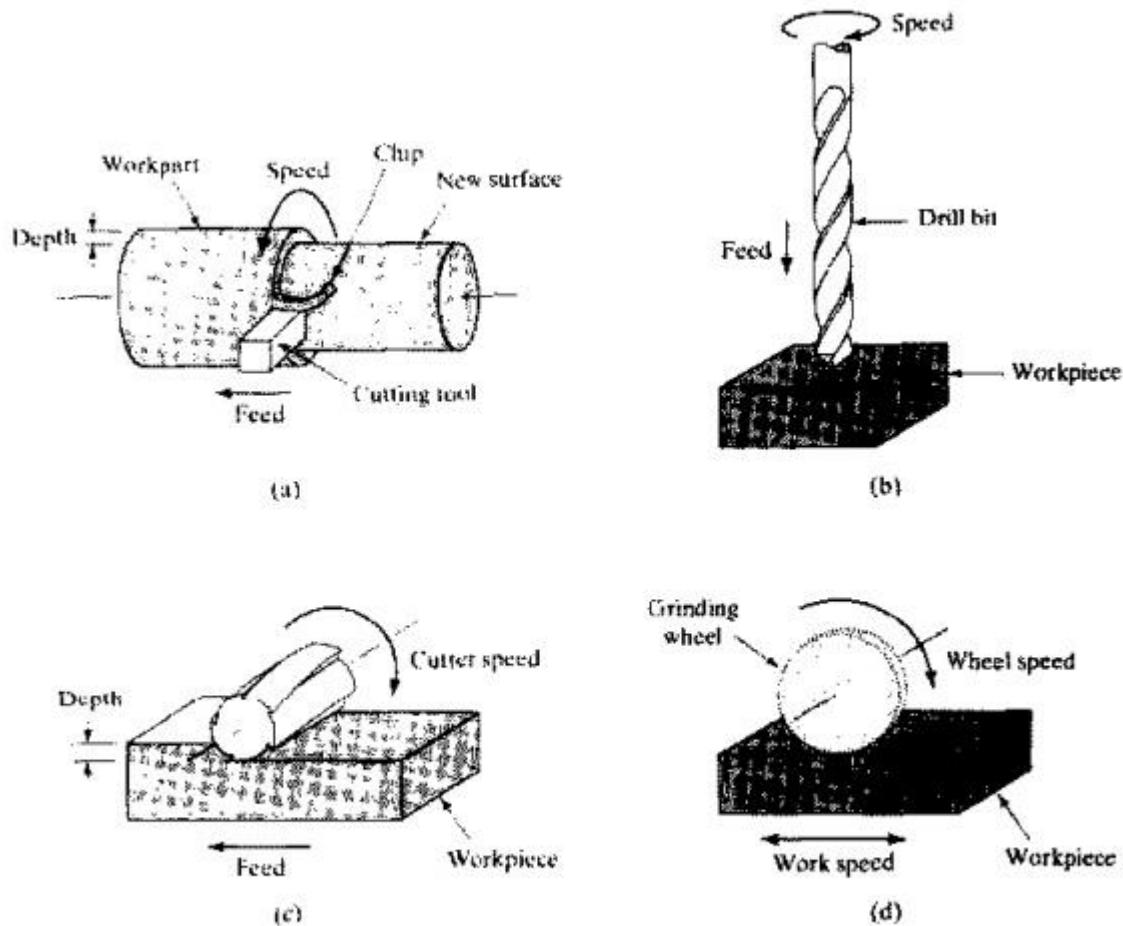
The four common machining operations: (a) turning, (b) drilling, (c) peripheral milling, and (d) surface grinding.
